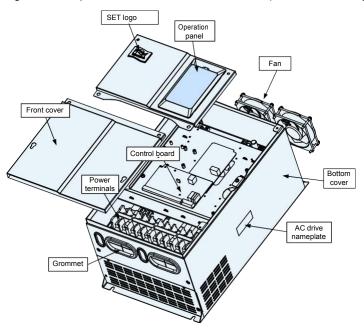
Components of the SET750 series AC drive (sheet metal housing)
